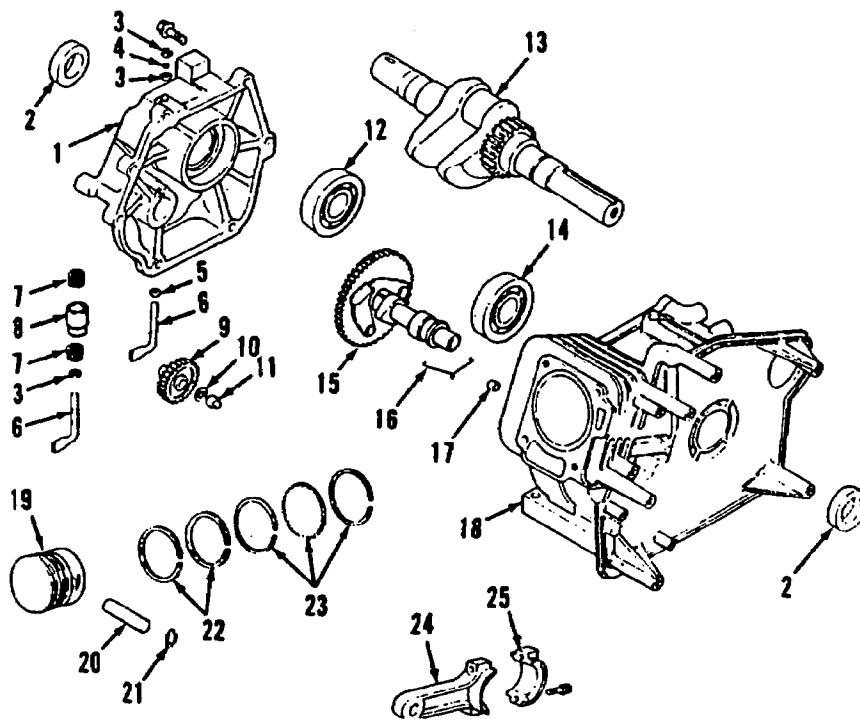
Exploded view of engine. Governor components (7 and 8) are used on some engines.
